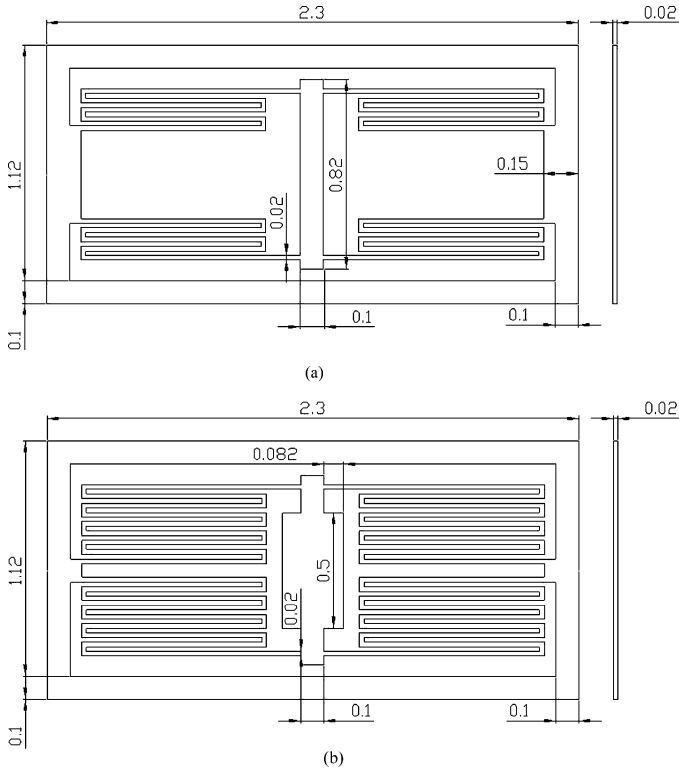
Dimensions of two typical sensors (mm): (a) Type 2 and (b) Type 4.
